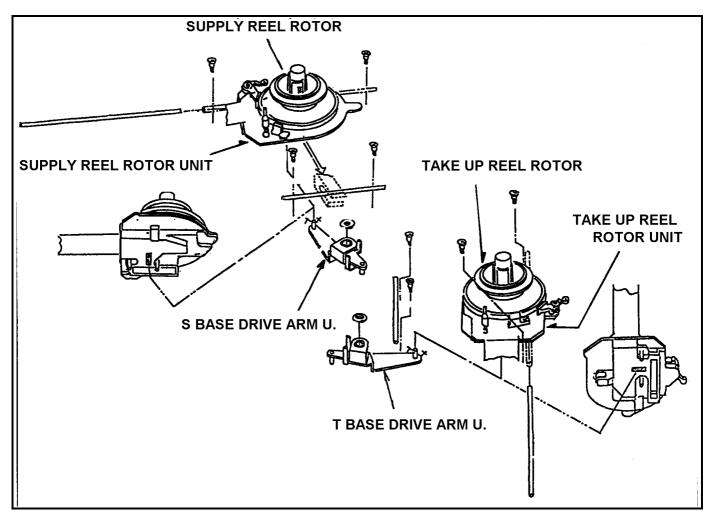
Installation of S & T Reel Rotor Unit
